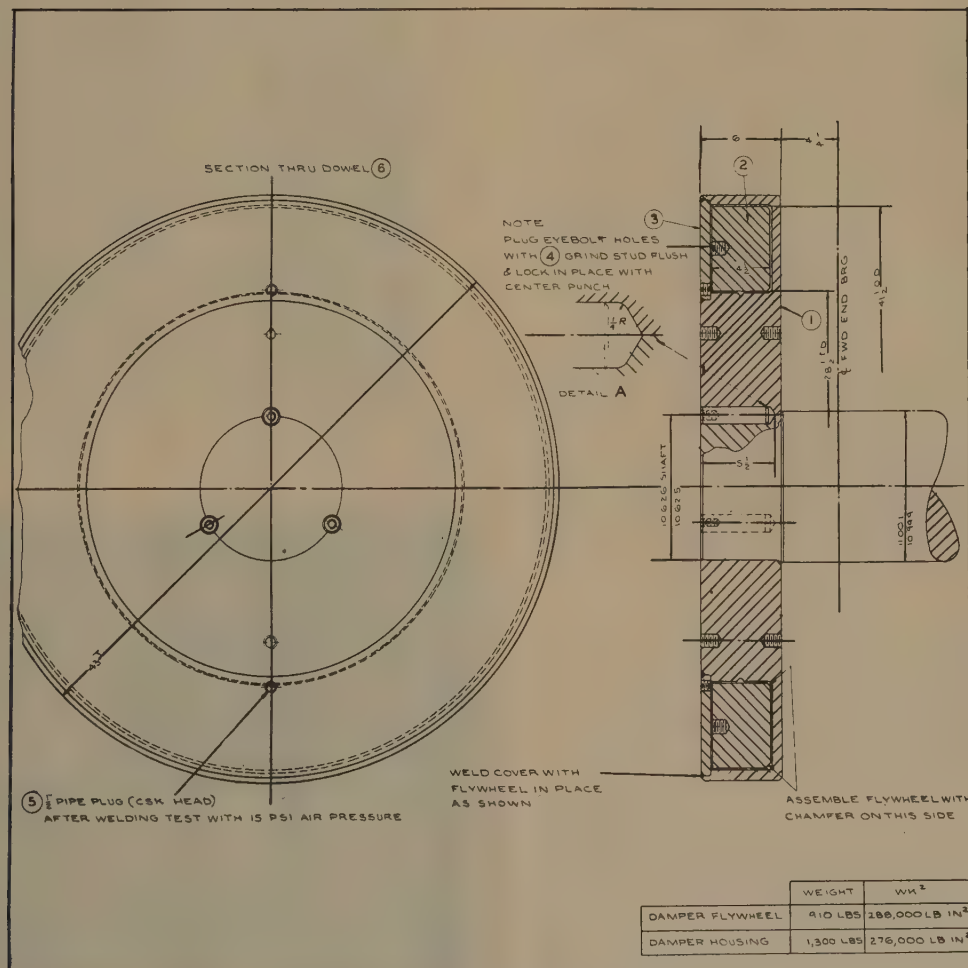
ASSEMBLY OF 43-IN-DIAM DAMPER
